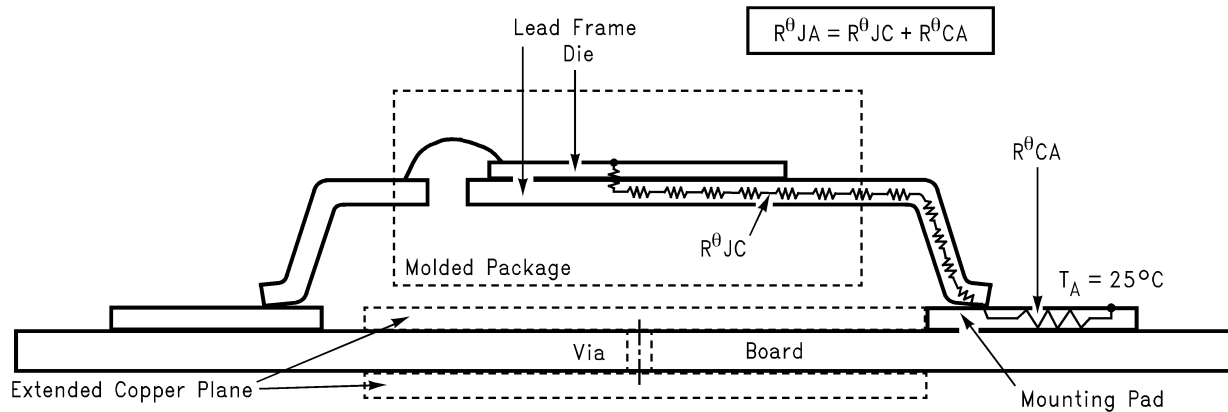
Cross-Sectional View Of Integrated Circuit Mounted On A Printed Circuit Board.
